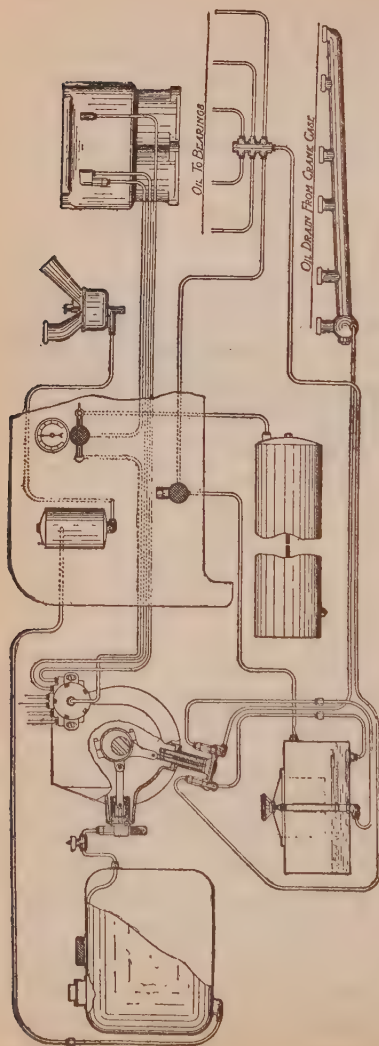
Diagram of the Winton lubrication system. A pump operated by an eccentric on the rear end of the crank shaft takes oil from the oil tank at the left side of motor and delivers it through leaders to the crank shaft main bearings and front gears. A second pump operated by the same eccentric draws oil from the crank case, where it is deposited by gravitation, and returns to the oil tank, where it passes through a filter before being used again. There is a sight test on the dash; the cylinders are fed by splash, while the transmission gears and clutch run in an oil bath.
